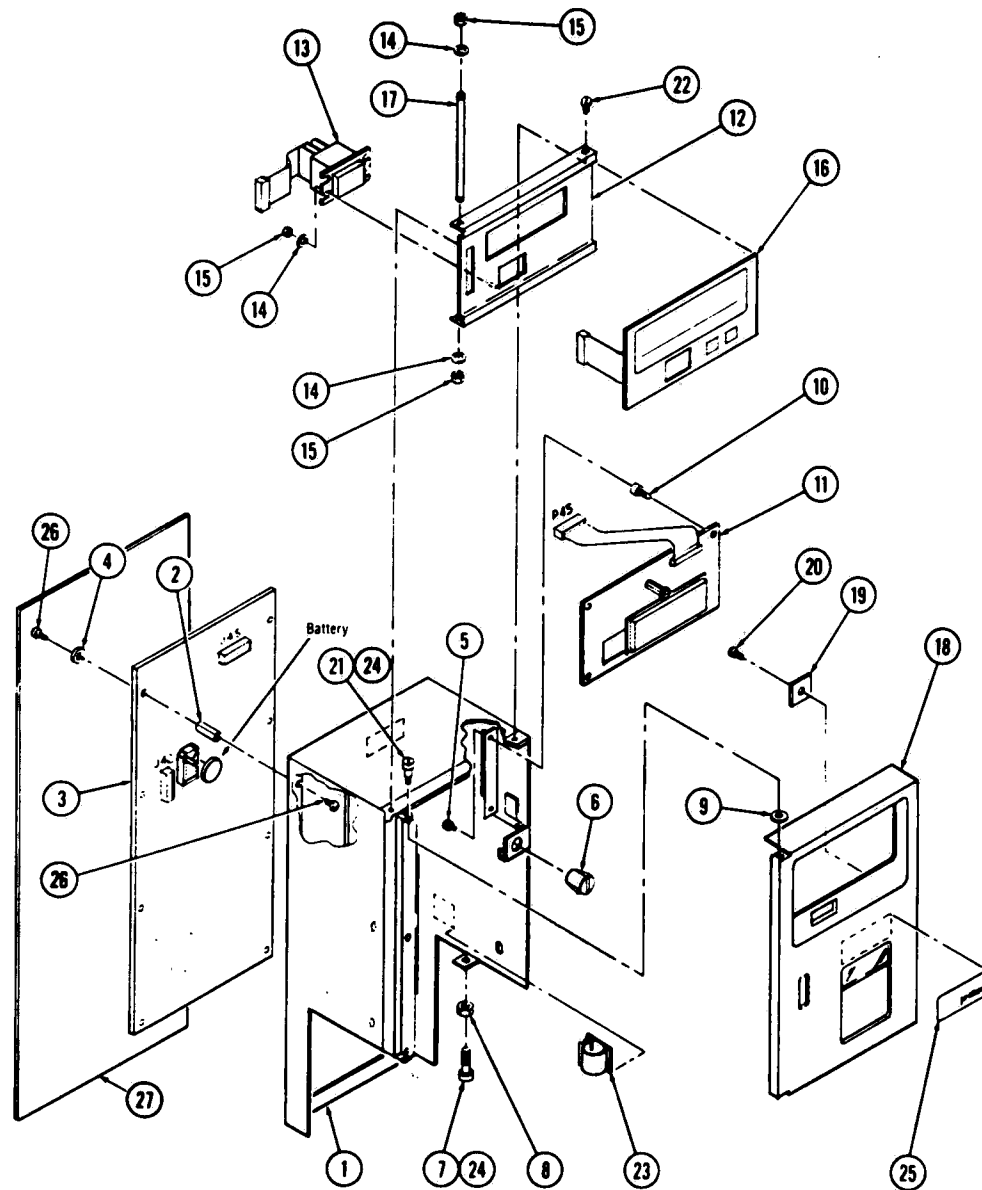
PRINTCON HOUSING ASSEMBLY, Eagle 2300.
